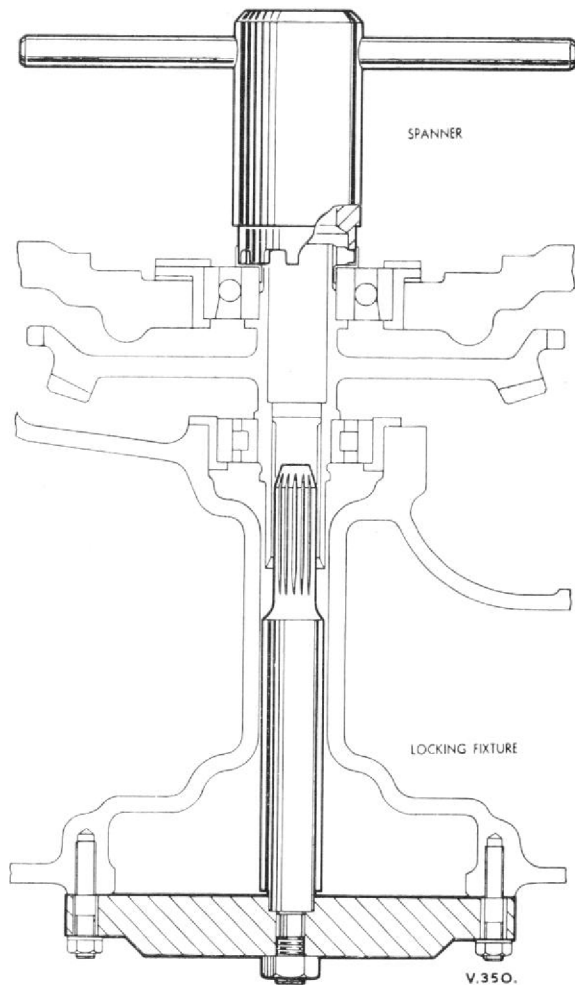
Locking fixture T.77177 and spanner T.71775 for loosening ring nut on fuel pump driving gear.
